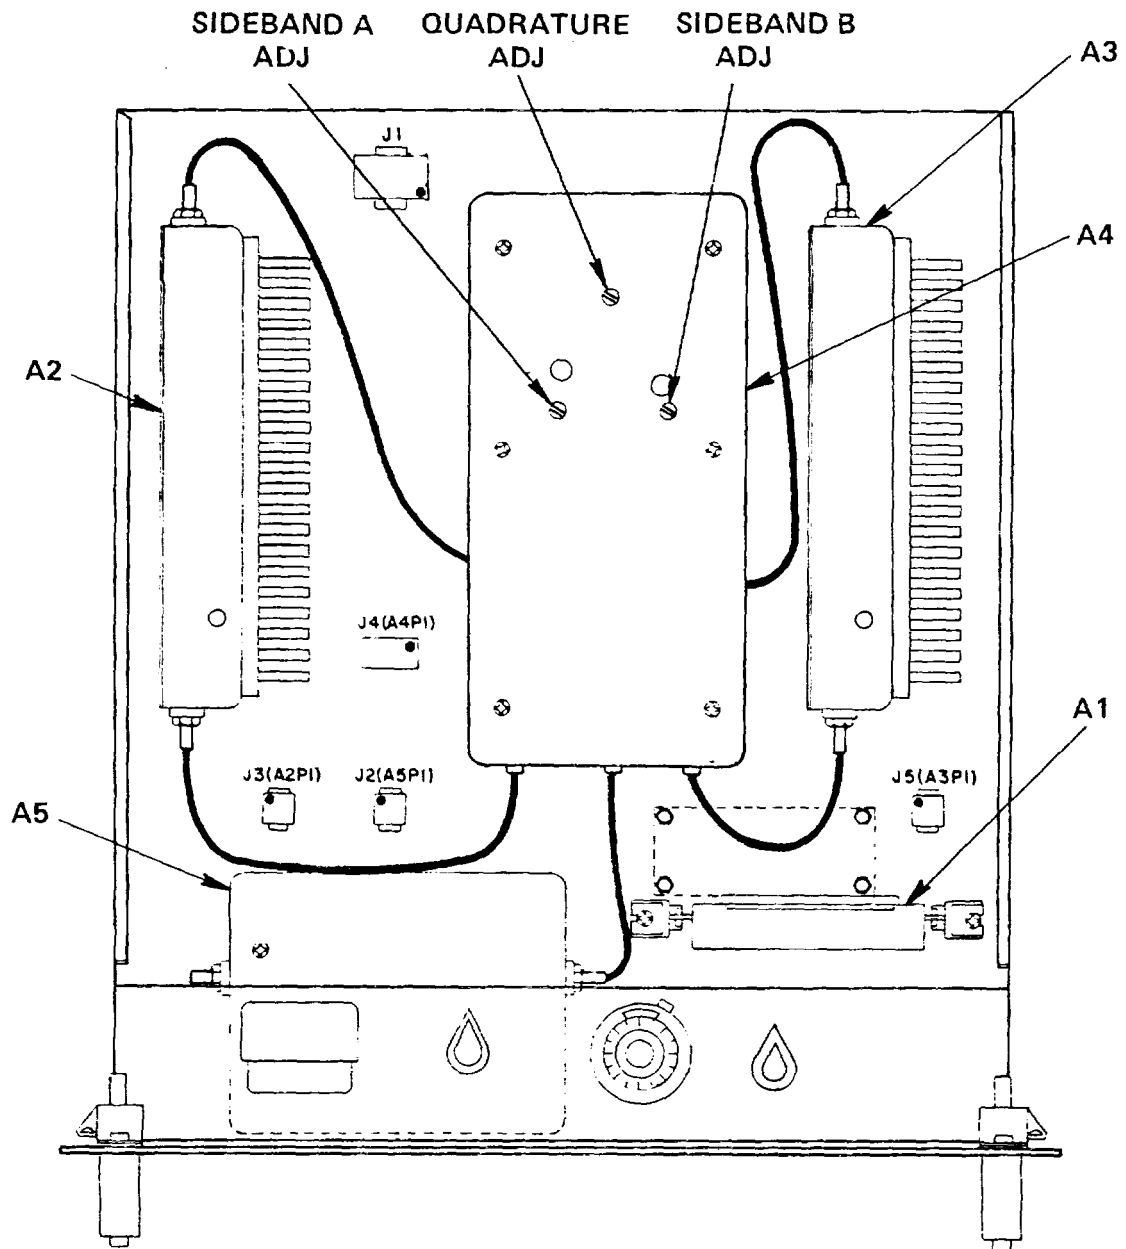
Sideband Transmitter Front Panel and Chassis-Mounted Parts Location Diagram (Sheet 1 of 3)
